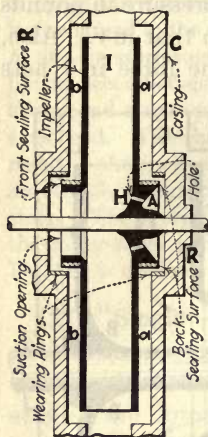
Showing Jaeger Method Of Impeller Balancing.
